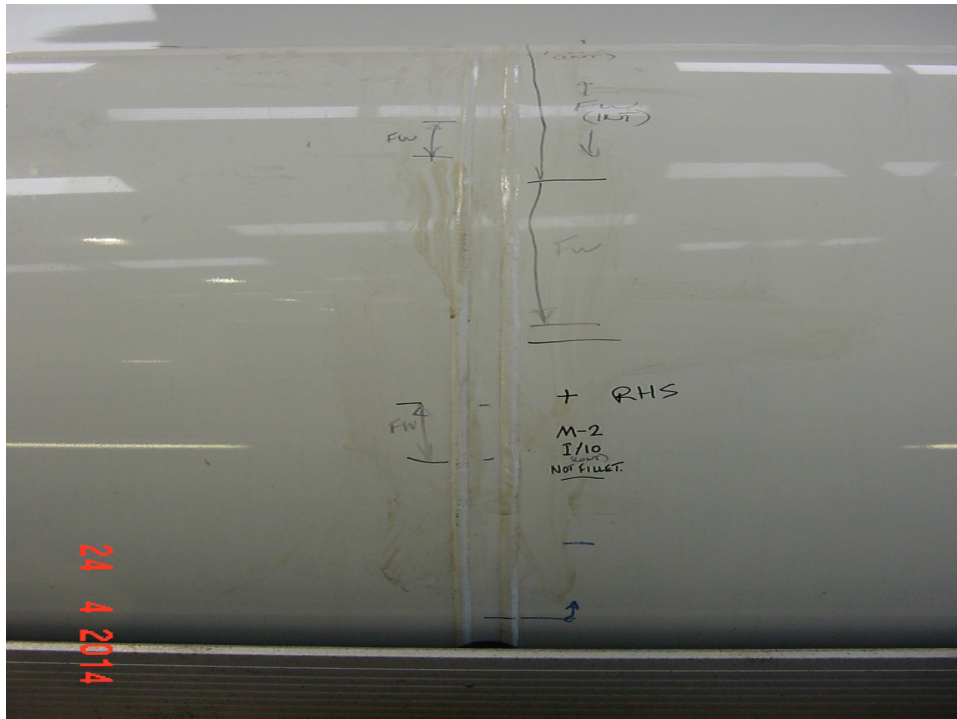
Offside (labelled right-hand side, RHS), Band H.
